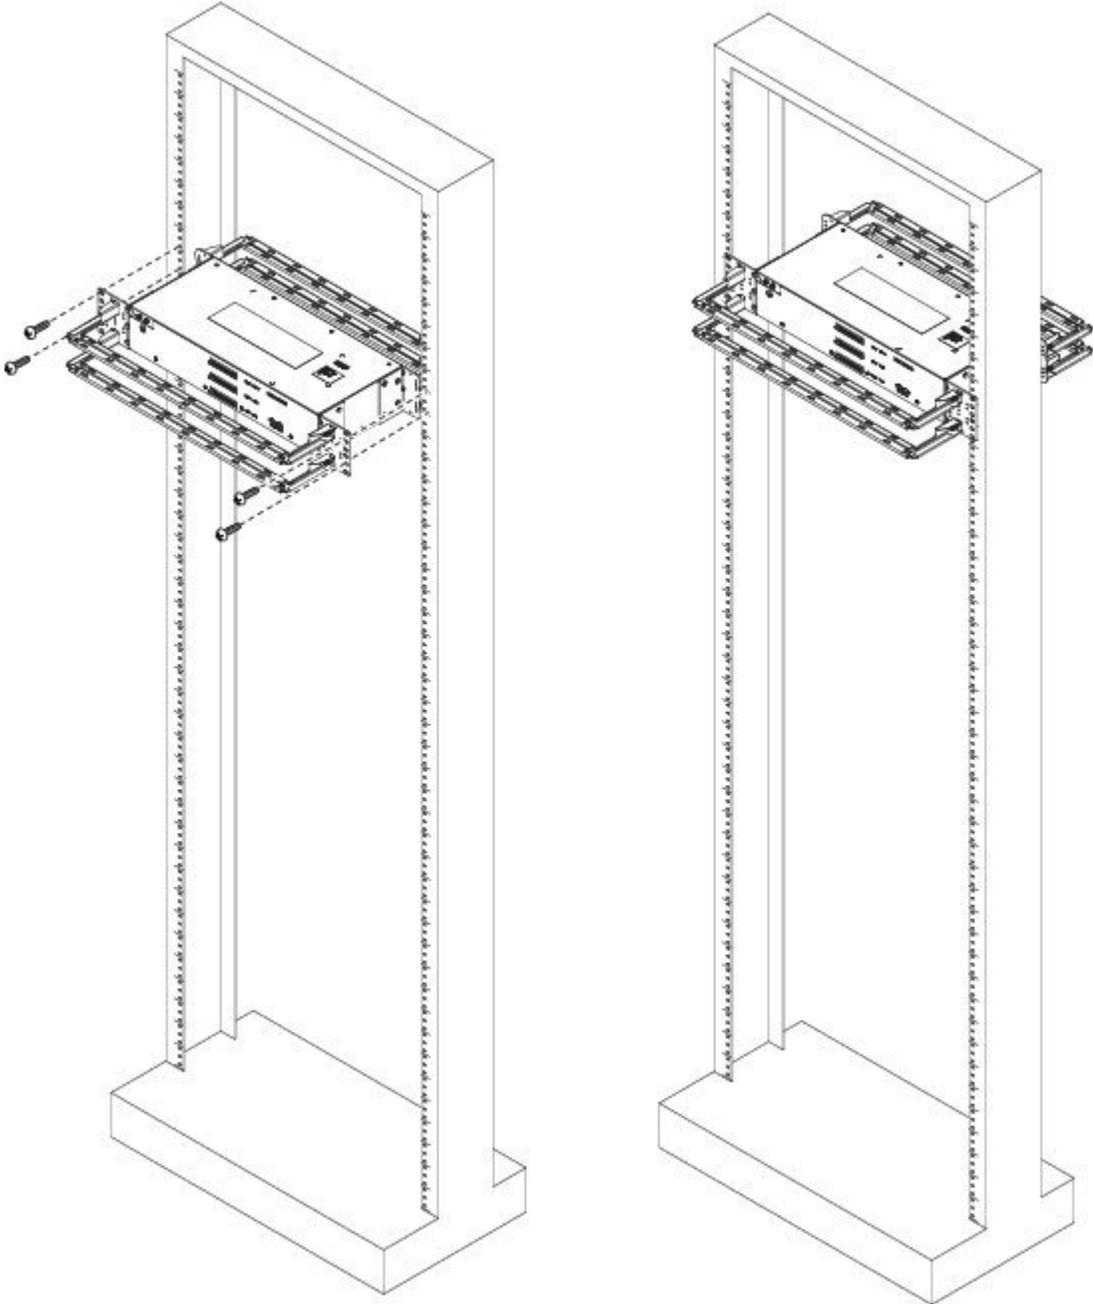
Patch Panel Rear View with Brackets and Guides Installed on Rack
